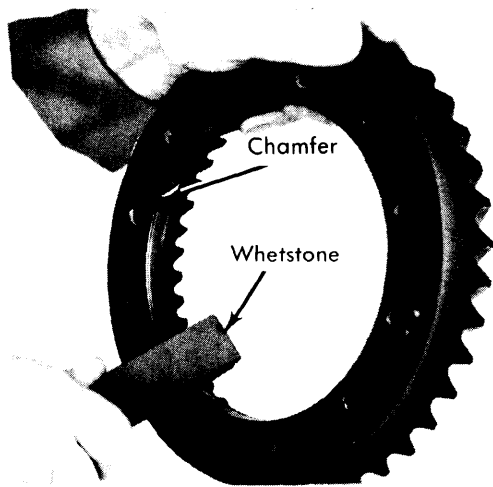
Procedure to Relieve Ring Gear Chamfer
